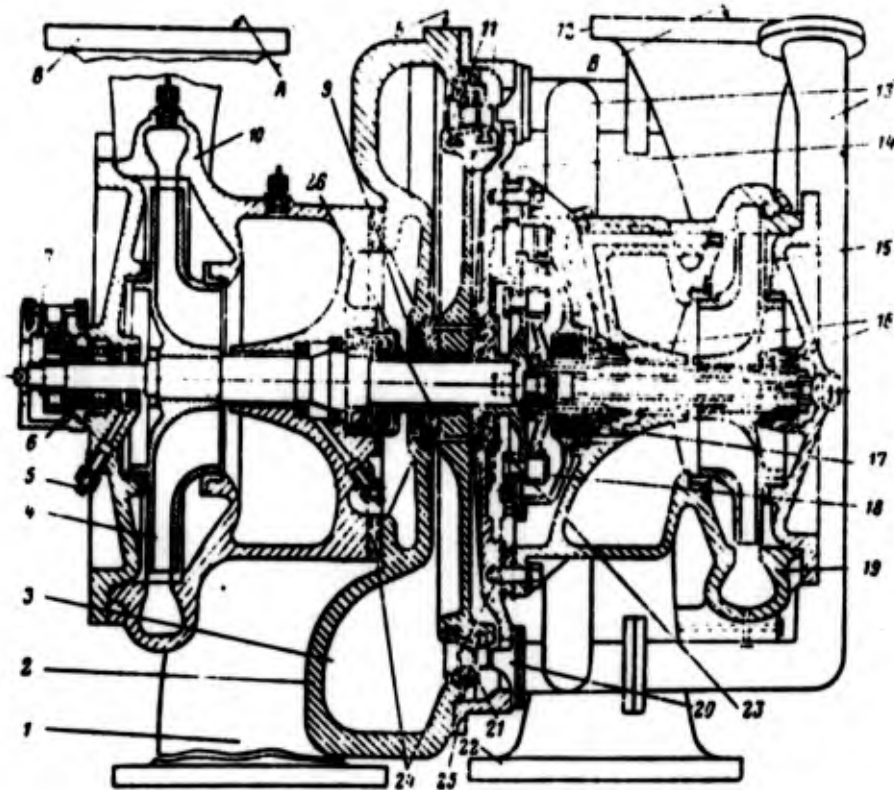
Turbopump unit: 1 - inlet volute of the fuel pump; 2 - casing of the turbine; 3 - exhaust collector; 4 - impeller of fuel pump; 5 - pipe connection; 6 - ball bearing; 7 - regulator of revolutions of the turbopump unit; 8 - branch pipe of the pump; 9 - packing of the turbine; 10 - casing of fuel pump; 11 - turbine blade; 12 - branch pipe of oxidizer pump; 13 - feed of vapor gas; 14 - turbine disk; 15 - impeller of oxidizer pump; 16 - plain bearings; 17 - packing; 18 - elastic coupling; 19 - casing of oxidizer pump; 20 - nozzle of the turbine; 21 - blades of guide vane; 22 - inlet volute of oxidizer pump; 23 - coupling disk; 24 - fixing keys; 25 - cover of the turbine; 26 - bushing; A, B - pumps; 5 - turbine.
